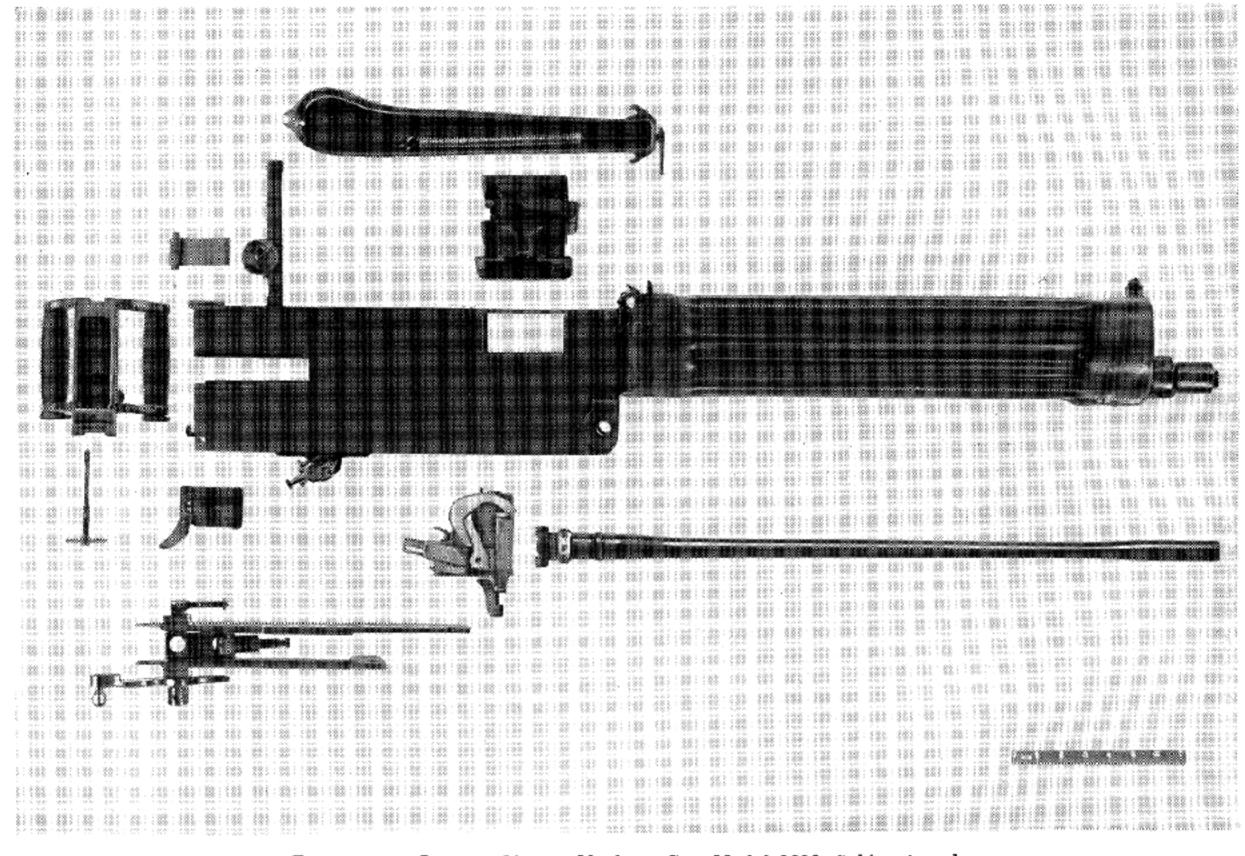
Russian Maxim Machine Gun Model 1910, field stripped.
